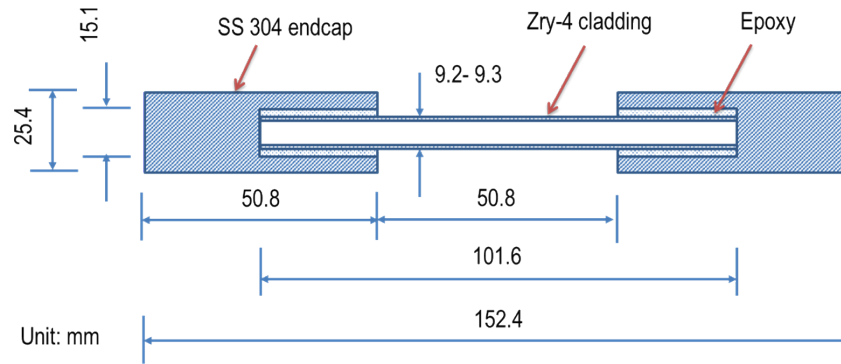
Schematic for specimen assembly used in fatigue testing.
